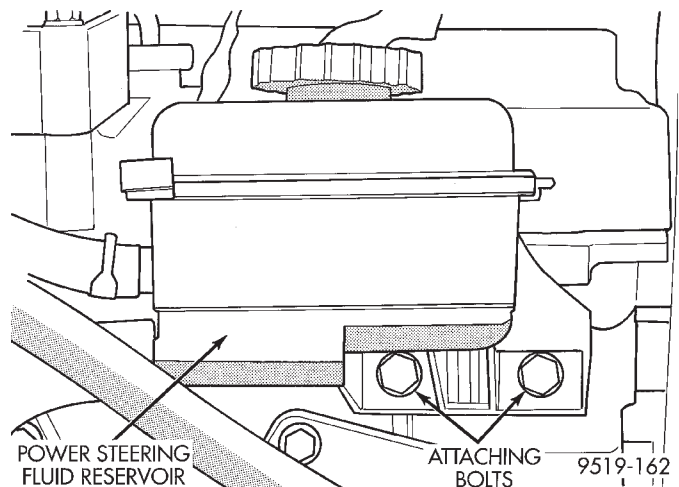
Power Steering Fluid Reservoir Mounting 2.4 Ltr. Engine
